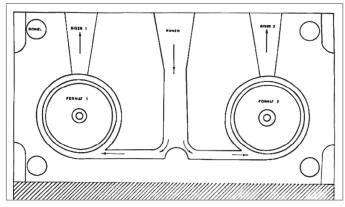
Sub-Assembly Showing Pulley Cavity (One half)
